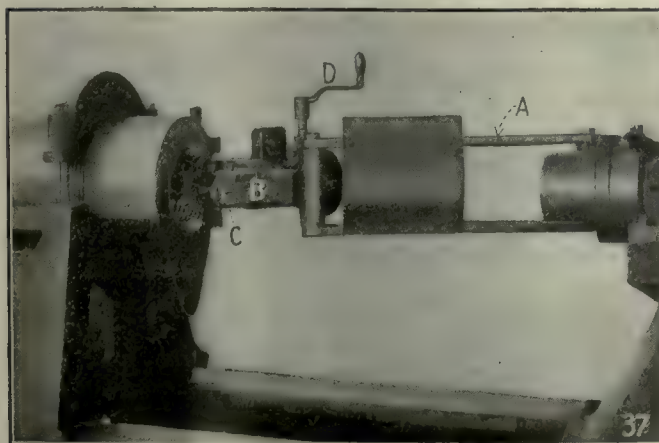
TOOL AND SWING ARM FITTED ON SHAPING MACHINE
